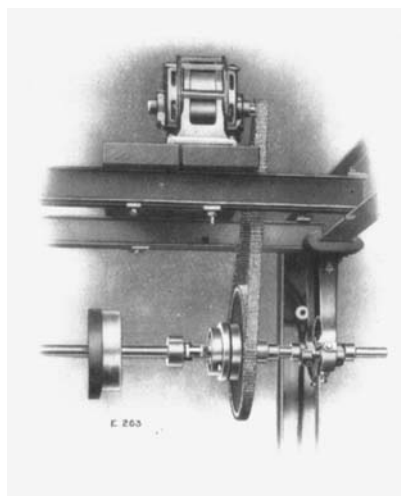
Motor connected to Line Shafting by Noiseless Drive Chain.
